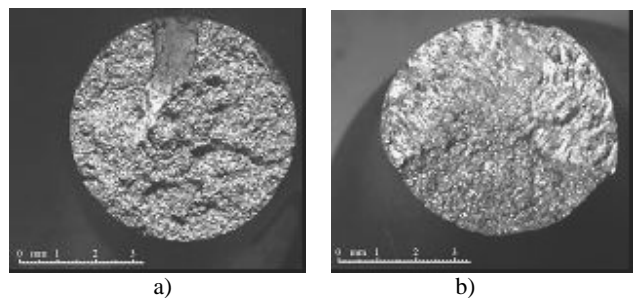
a) Fracture surfaces of 2-AS5U3G-Y35 specimens produced by ultrasonic cyclic torsion ($\tau_{max} = 70\text{MPa}$, $R = -1$, $N_f = 9.5 \times 10^7$) and b) Static fracture occurred in the centre area (both of the pictures were taken in macroscopic scale)
